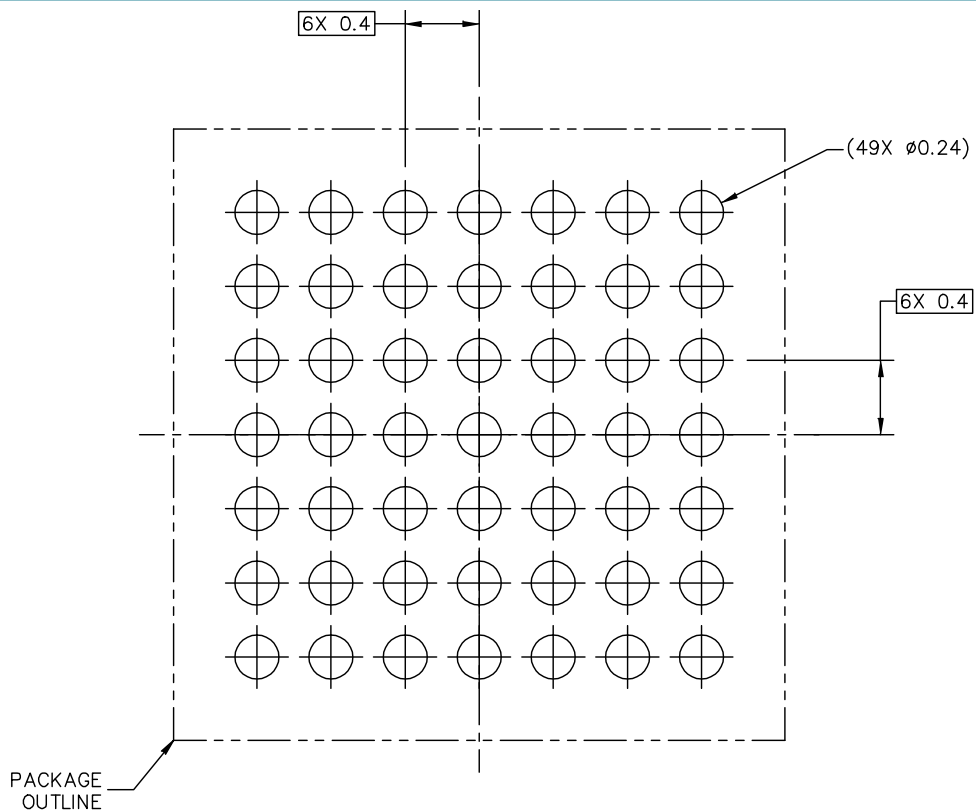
Reflow soldering footprint part1 for WLCSP49 (SOT1444-11)
